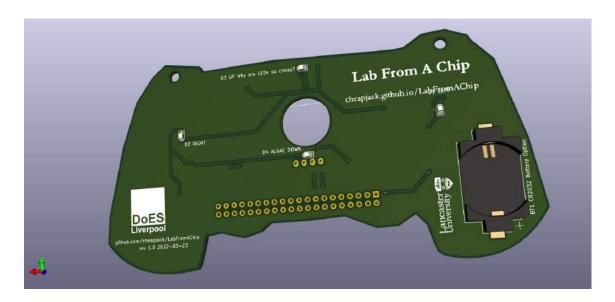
LabFromAChip reverse PCB render in KiCAD software
